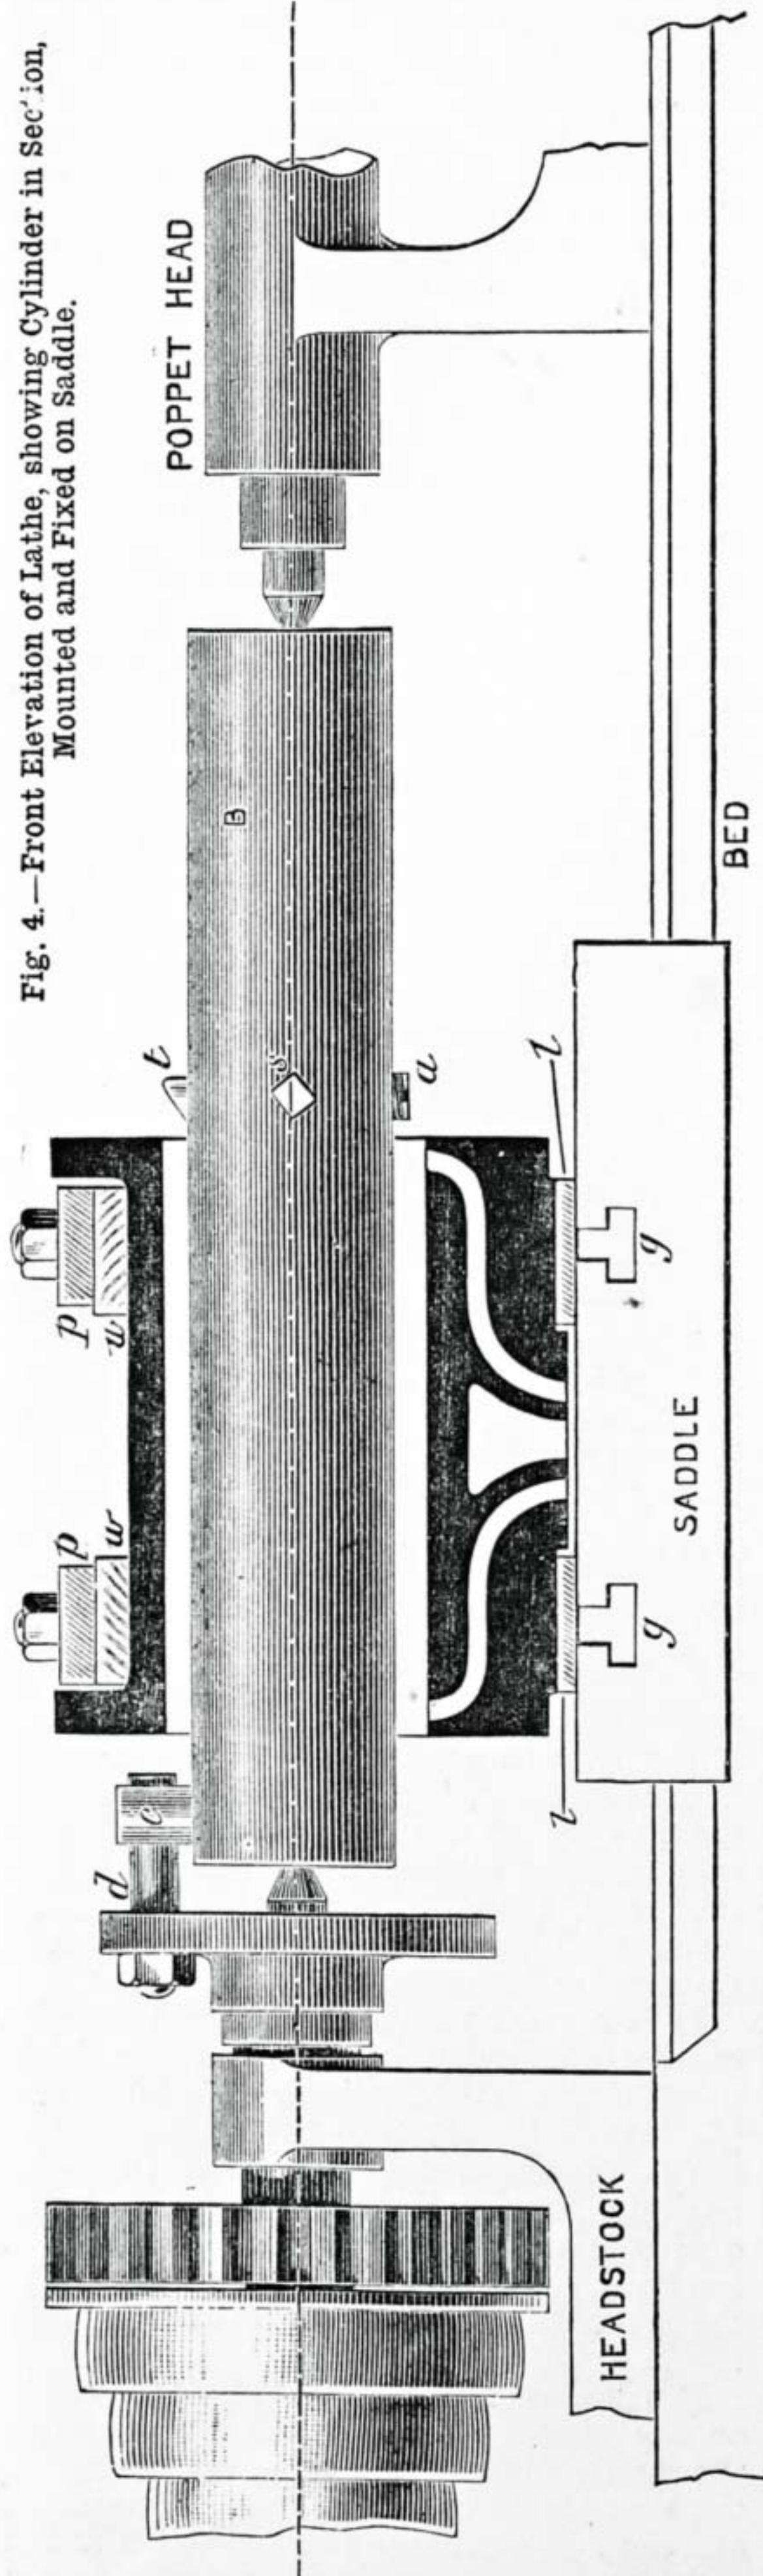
Front Elevation of Lathe, showing Cylinder in Section, Mounted and Fixed on Saddle.
